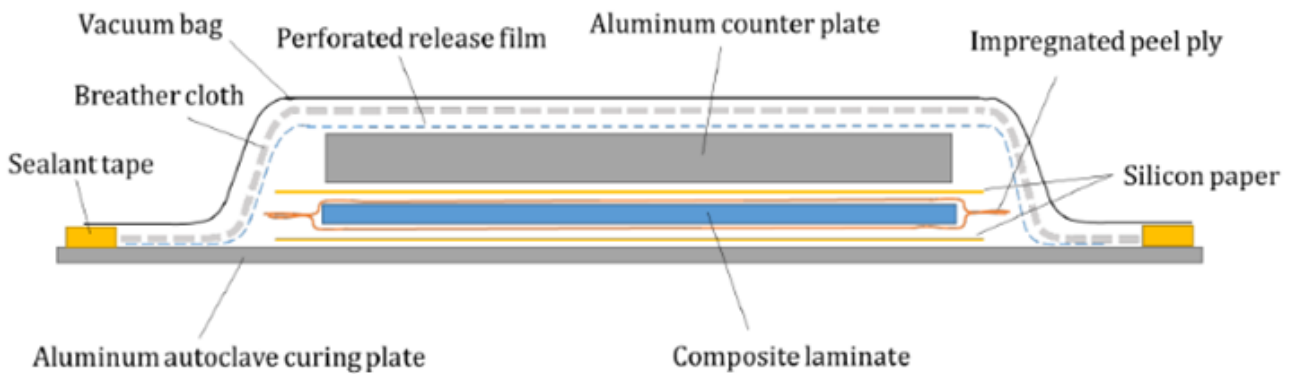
View of the different layers of curing consumables of the best-performing curing set-up and vacuum bag assembly.
